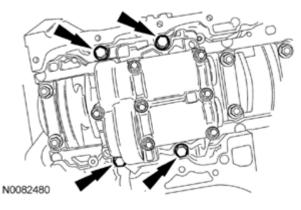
Locating Balancer Unit Bolts Courtesy of FORD MOTOR CO.
